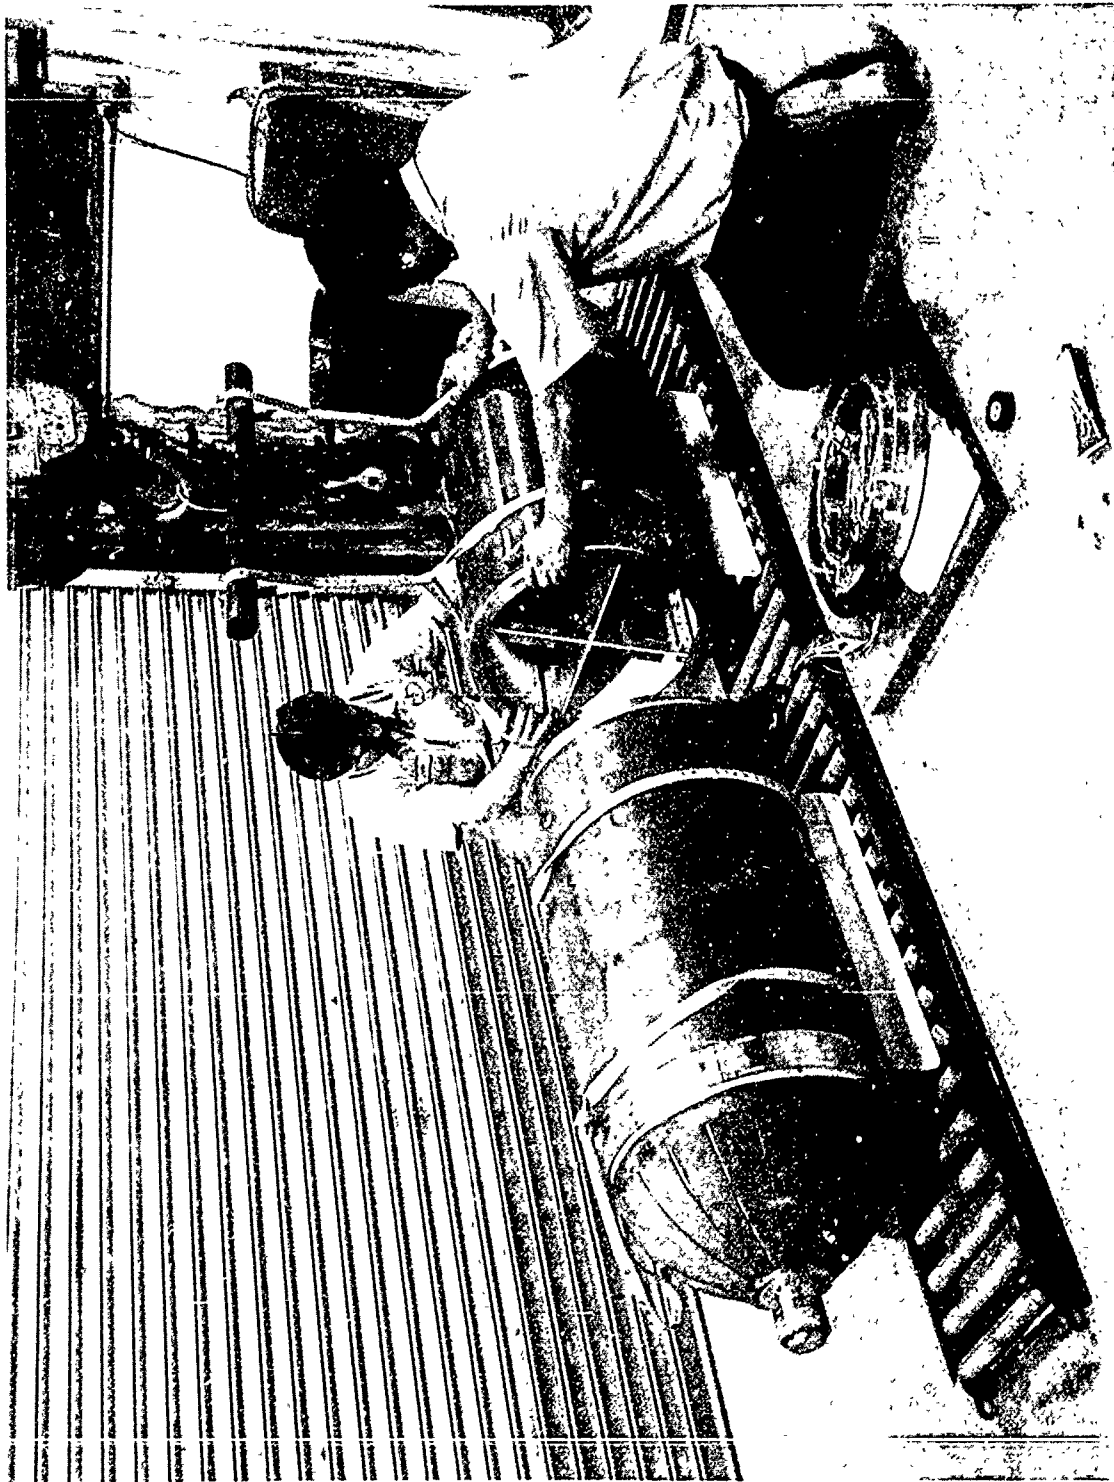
Mating of components for the long housing test assembly. Note the roller conveyor which facilitates the mating of components.
